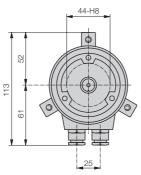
Basic unit for fitting to measuring instruments with revolving indicator shaft. The measuring instrument must have an extended indicator shaft at the back (1.5 mm dia., length 6...7 mm).
